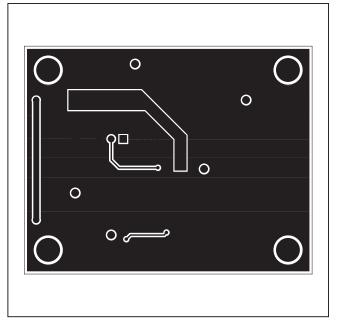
MAX16909 EV Kit PCB Layout—Solder Side
